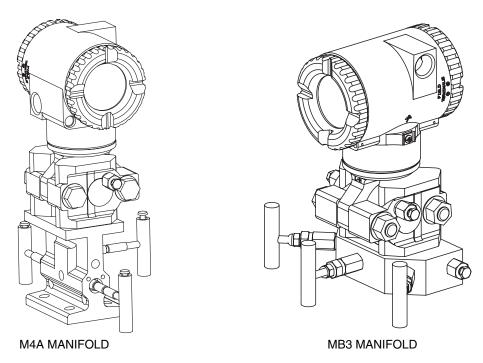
Typical Mounting of an IDP Transmitter Supported by a Bypass Manifold
